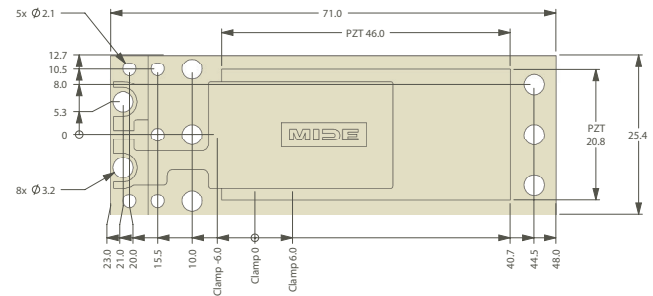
The overall dimensions (mm) for the PPA-1013 are shown. The total thickness is 1.98mm (78 mils).
